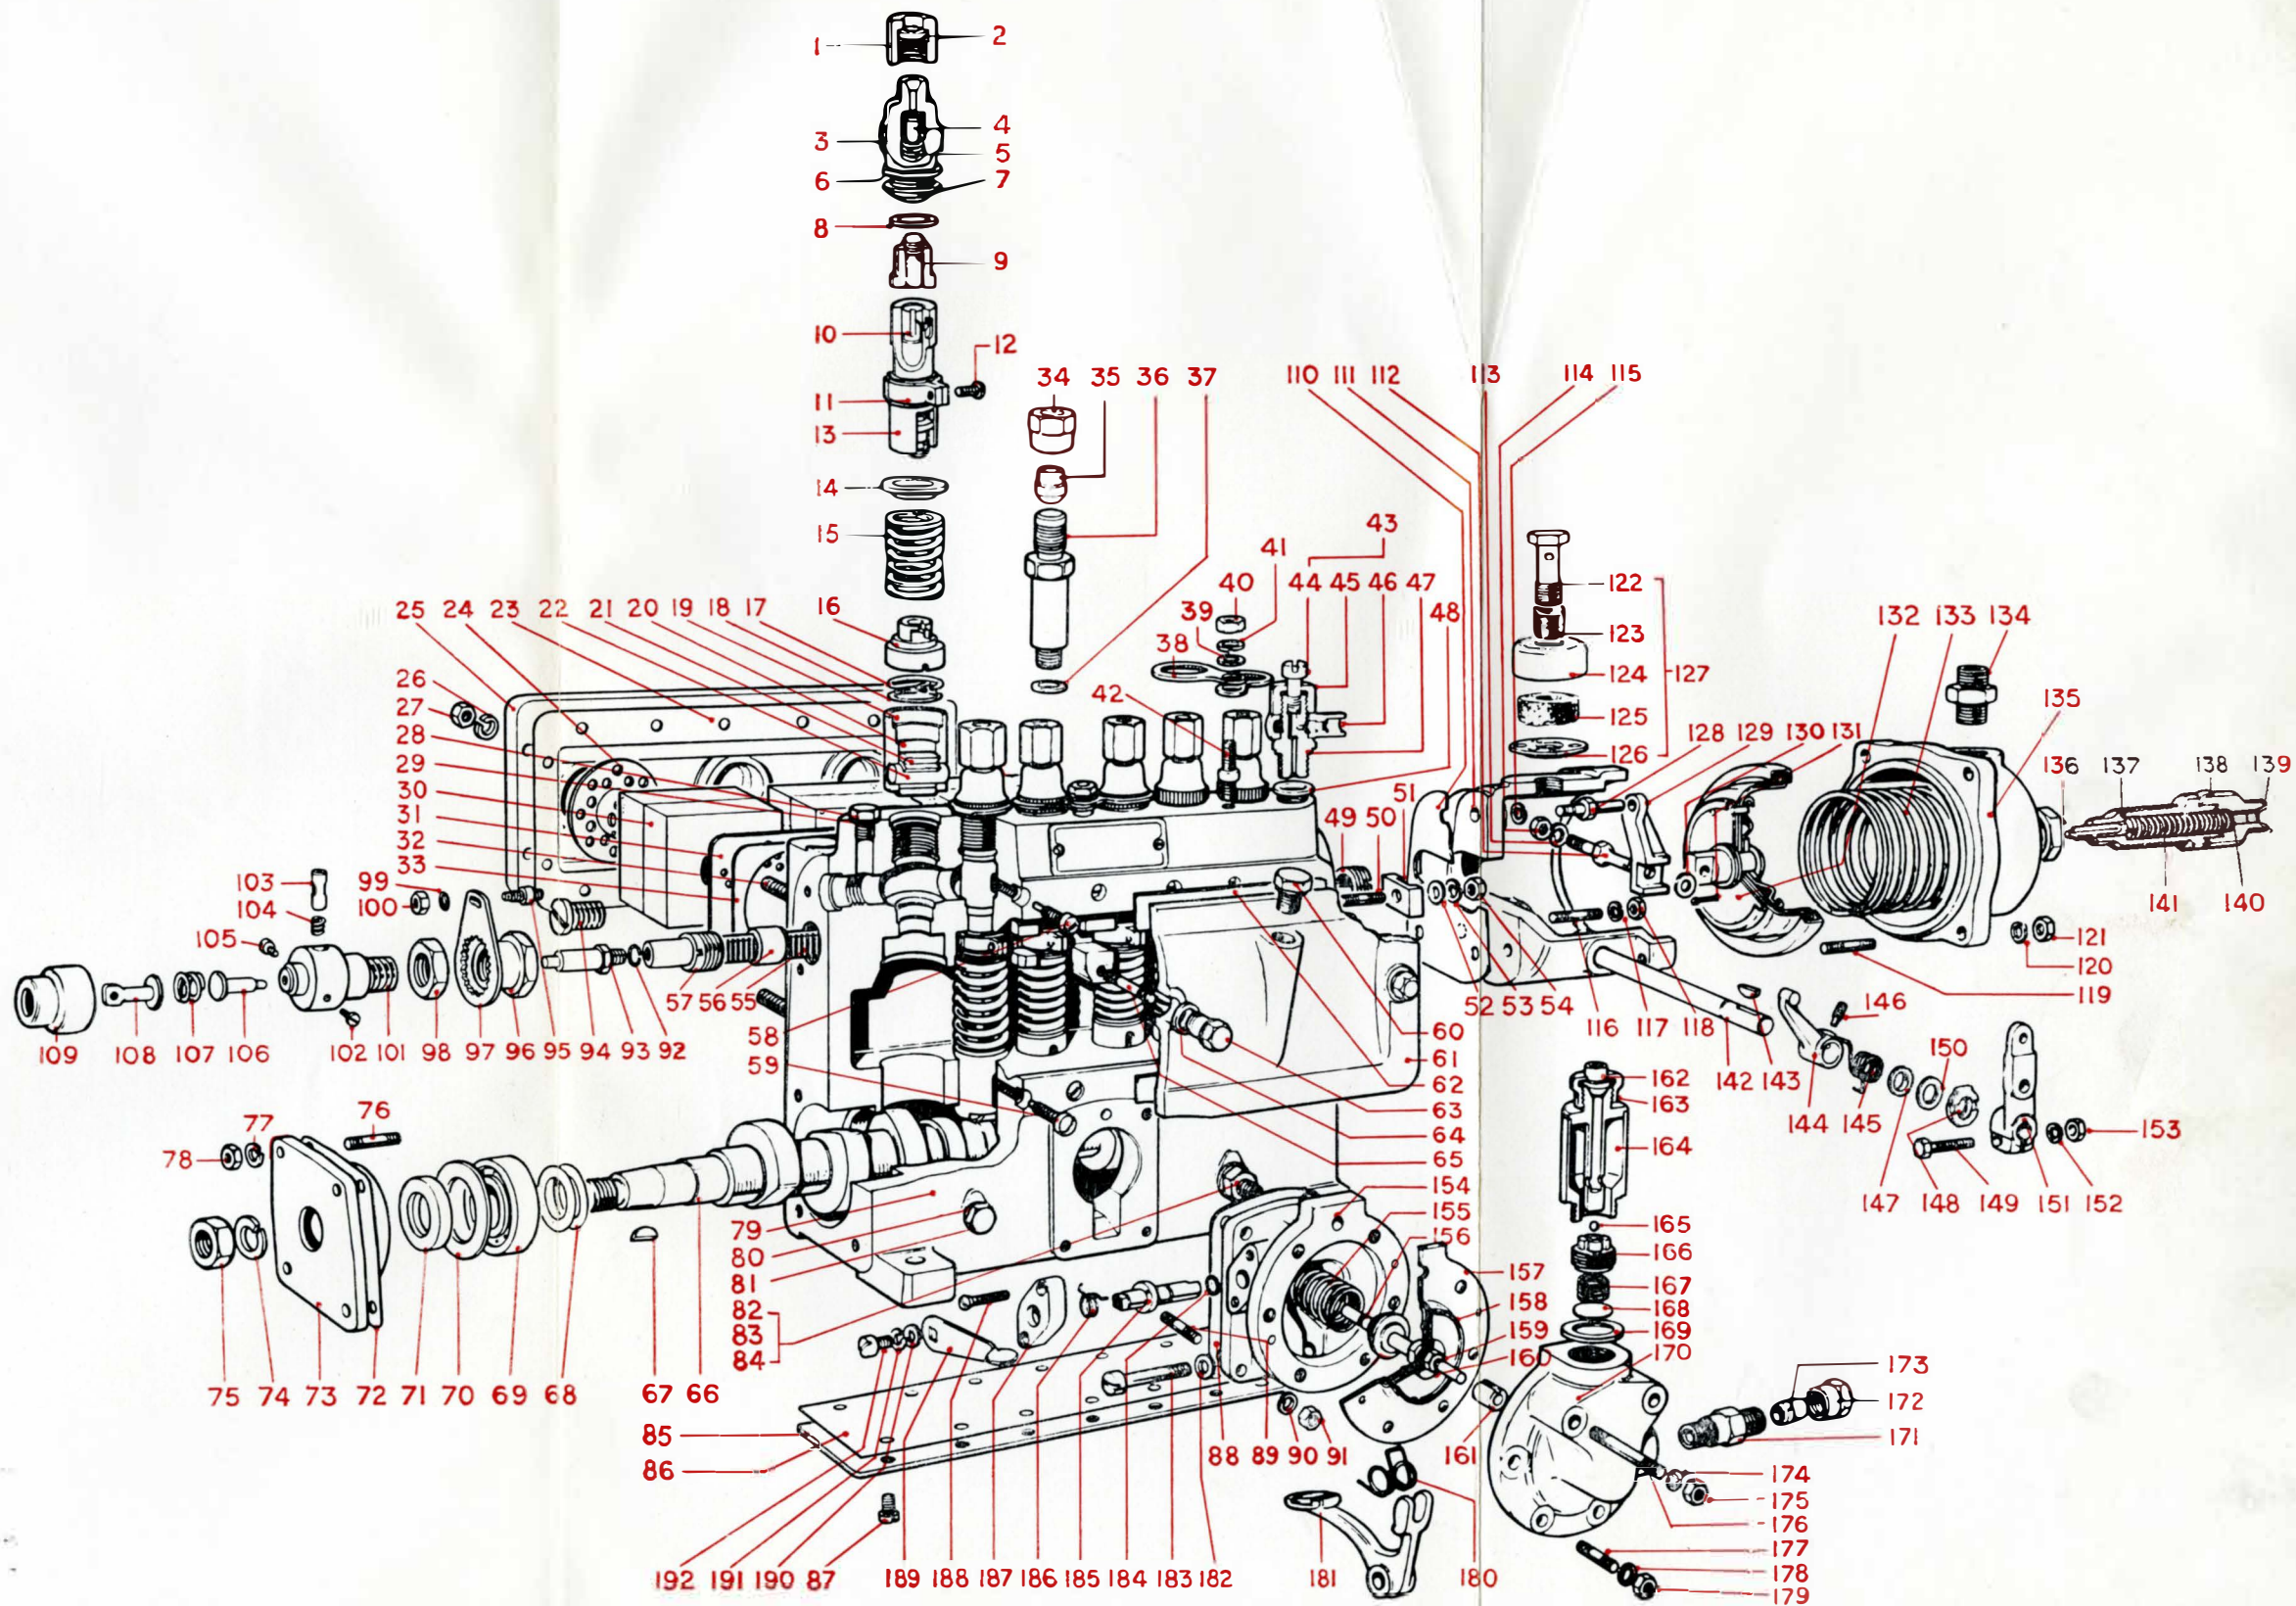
EXPLODED VIEW OF THE C.A.V. TYPE NL FUEL PUMP, with baulking-type excess fuel device
